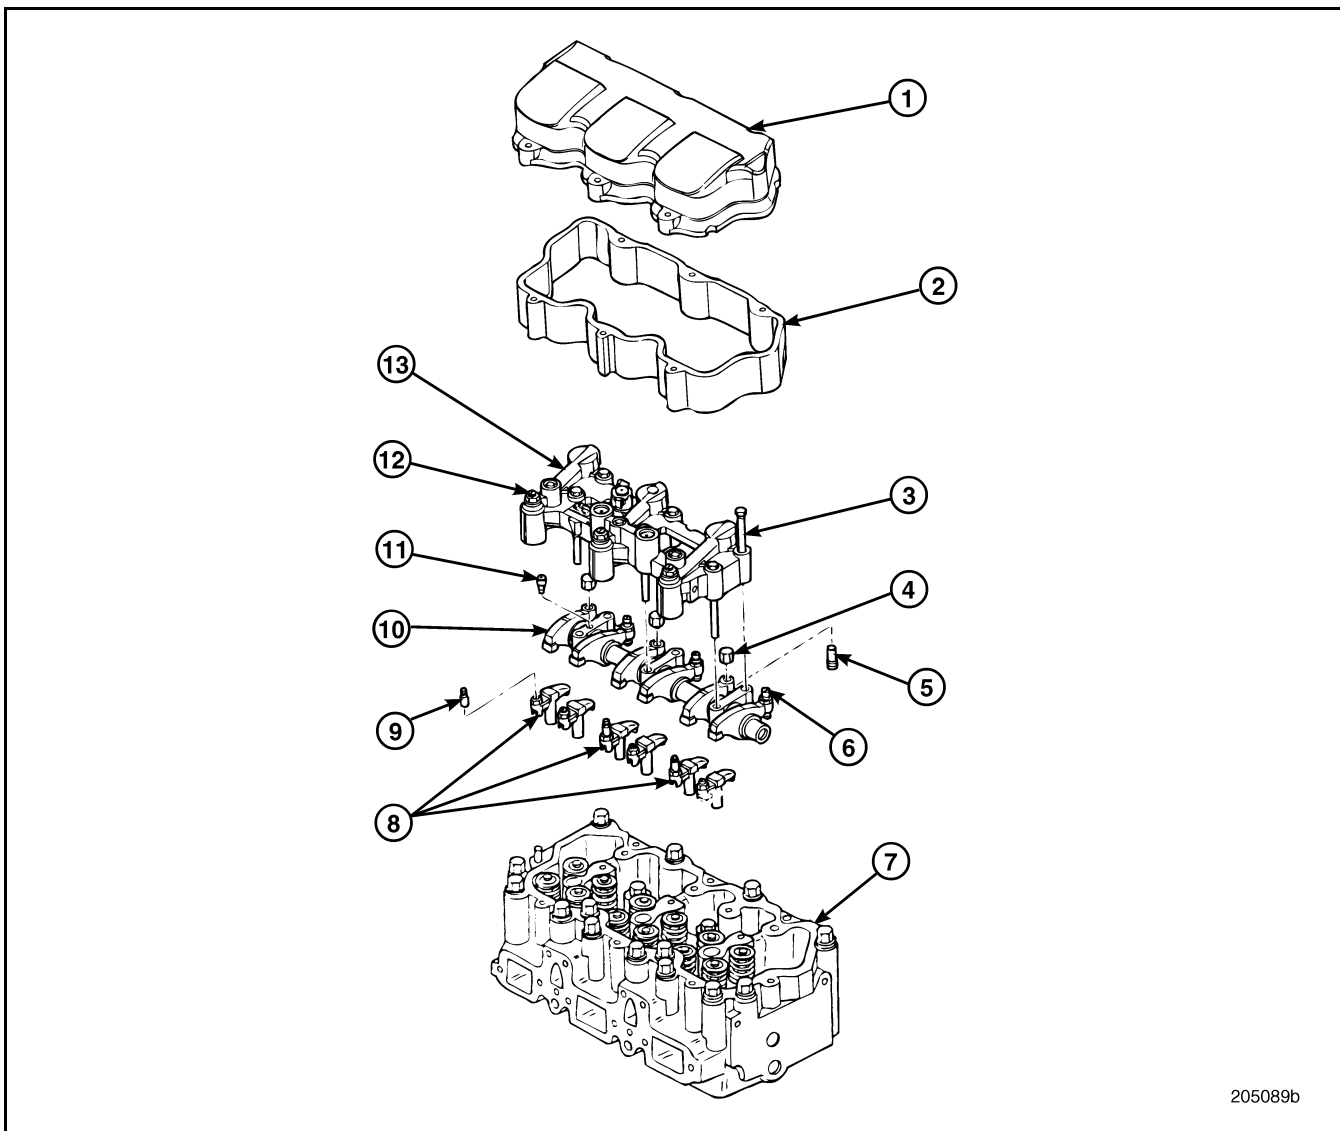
Rocker Arm Shaft and J-Tech™ Engine Brake Components
